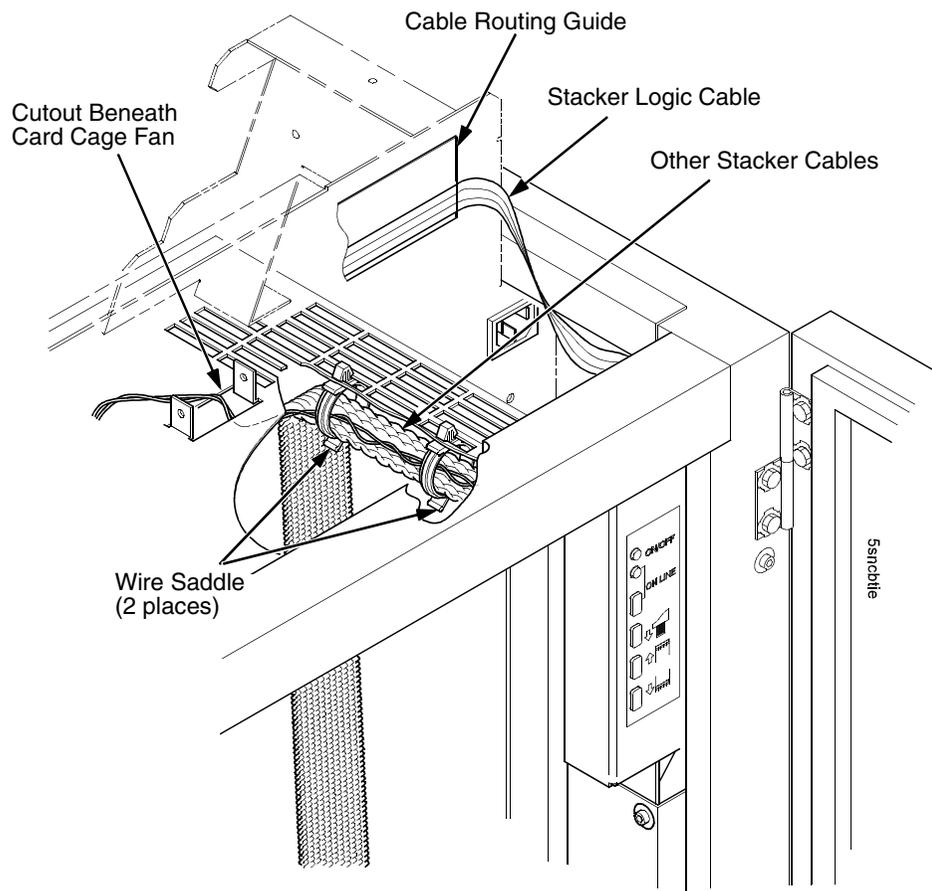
Securing Stacker Cables in a Printer With a CMX/CFX Controller Board
